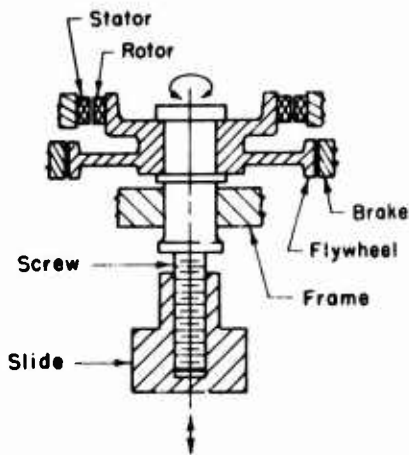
SCHEMATIC OF THE DIRECT ELECTRIC DRIVE SCREW PRESS WITH REVERSING MOTOR
